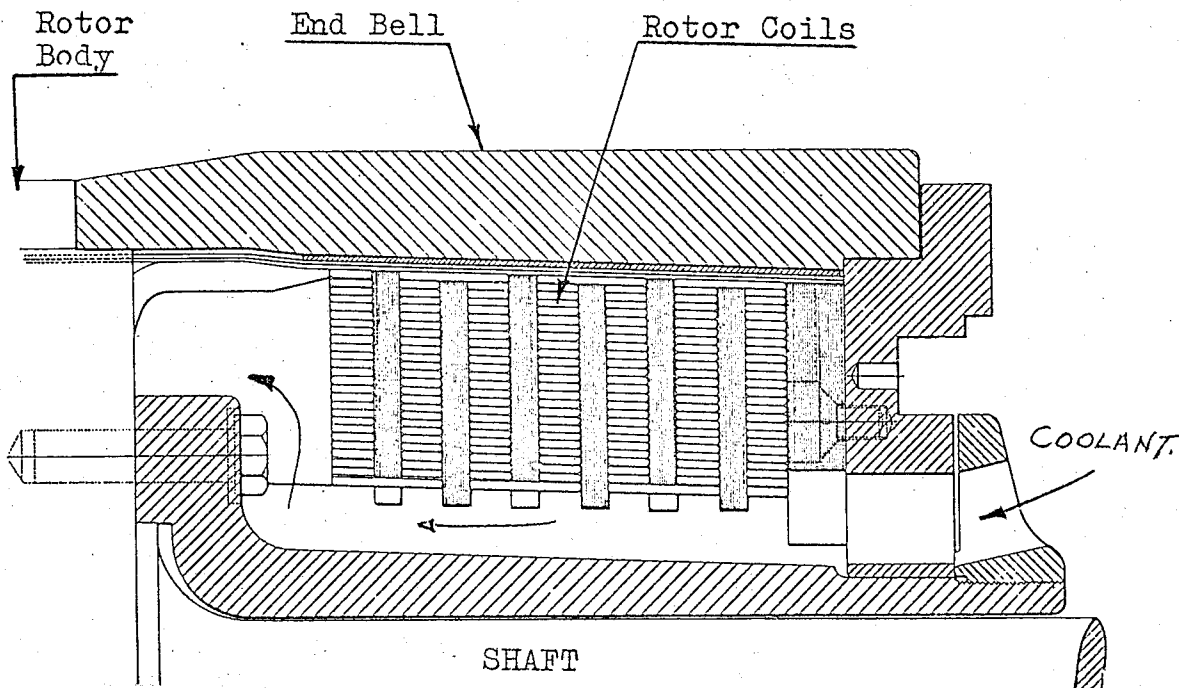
Cross-section of rotor retaining rings holding end-turns in place.
